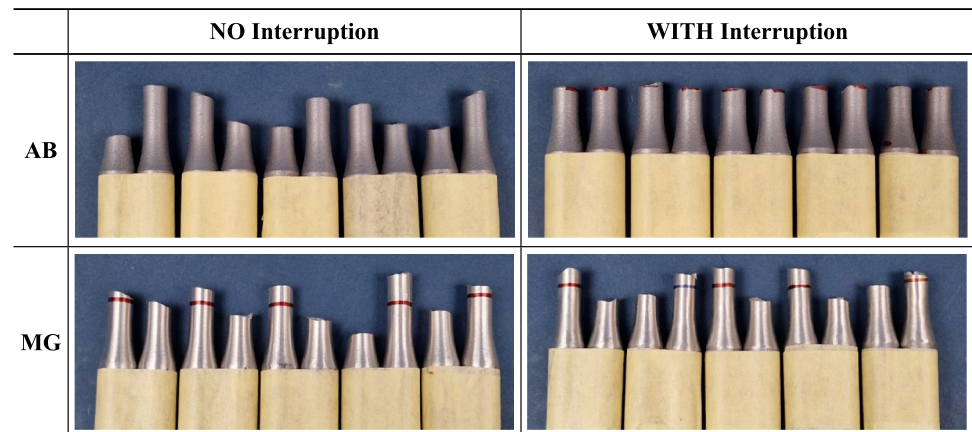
Fracture location of representative fatigue specimens printed without (NO) and with a process interruption (WITH) for the machining conditions as-built and manually ground. Blasted and vibratory finished samples show the same fracture pattern as the as-built samples
